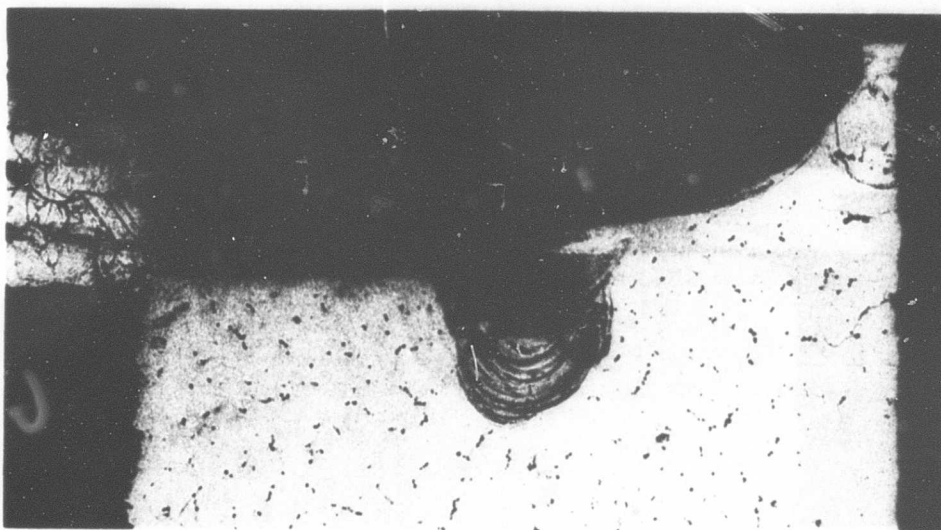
A Simulated Trailing Edge Closure Weld. (No Filler Wire Was Required in This Specimen.)
